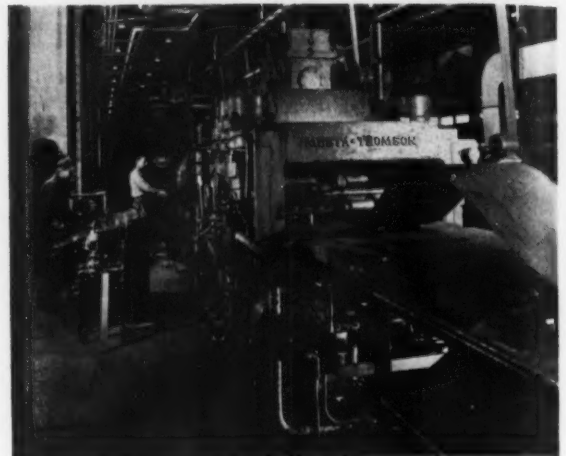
In the welding of strip in the flash welder, the head of the welder, foreground, moves toward the stationary head as the welding progresses. This necessitates having a loop in the strip at the start of the operation. At left, operator controls entry end of the line as well as the flash welder.
